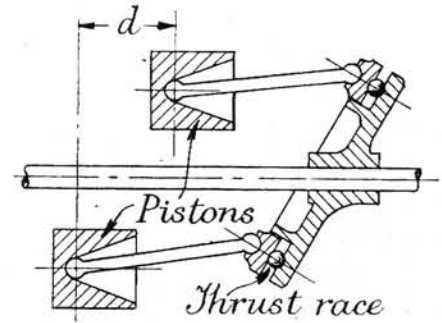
Mechanical connection of pistons to a swashplate, showing method of taking end thrust.
